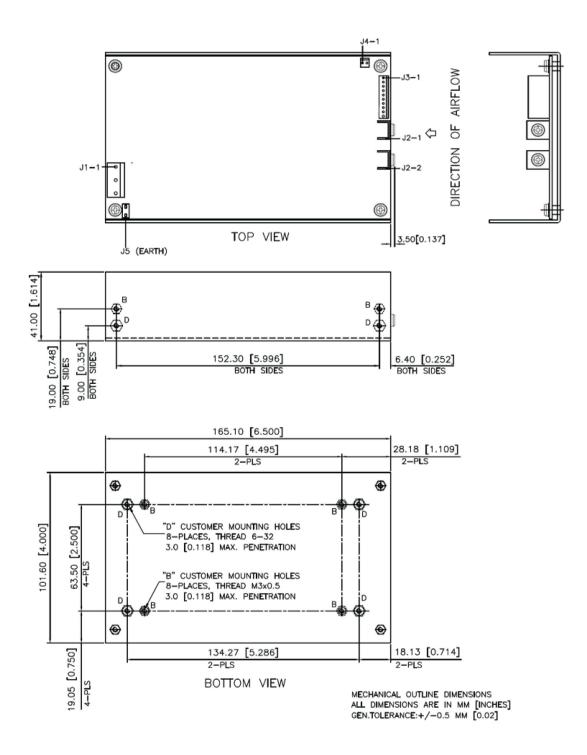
Mechanical Drawing (With Top Fan Mounting)
